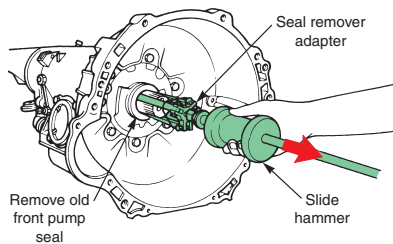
It is easier to remove the front pump seal with the transmission or transaxle assembled. The weight of the unit allows the slide hammer to exert more force on the seal. (Ford)
